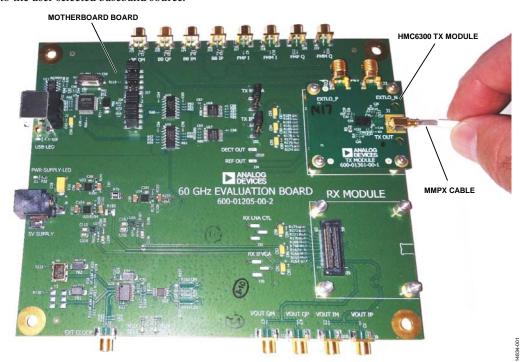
HMC6300 Assembly with the Motherboard Populated with the TX Module
